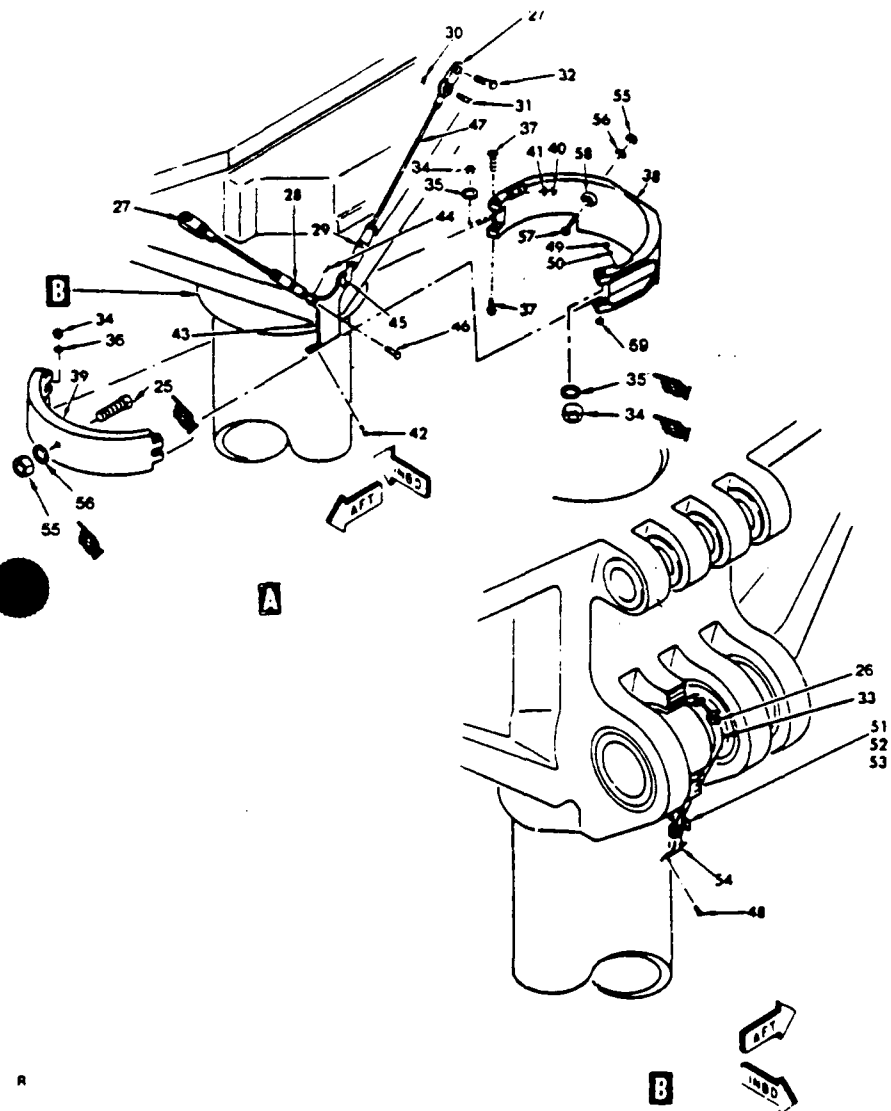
RH Aft Strut Assembly (Sheet 2 of 18)
